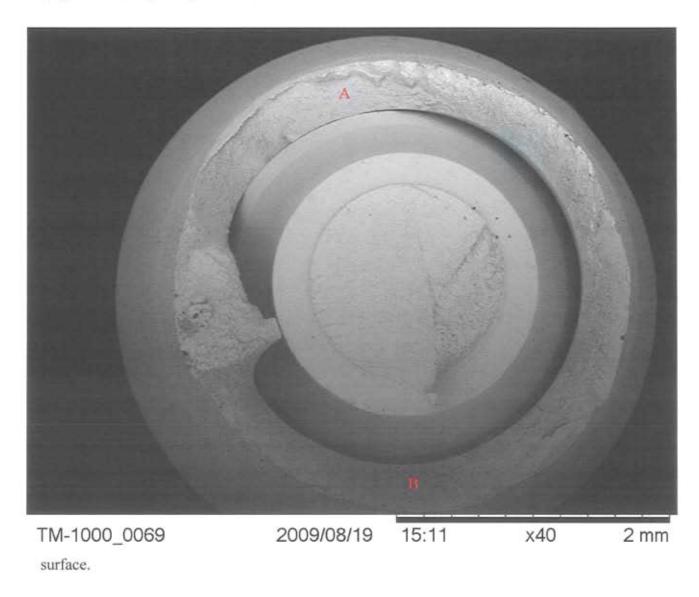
Fracture surface of implant (BlueSkyBio implant#2),
